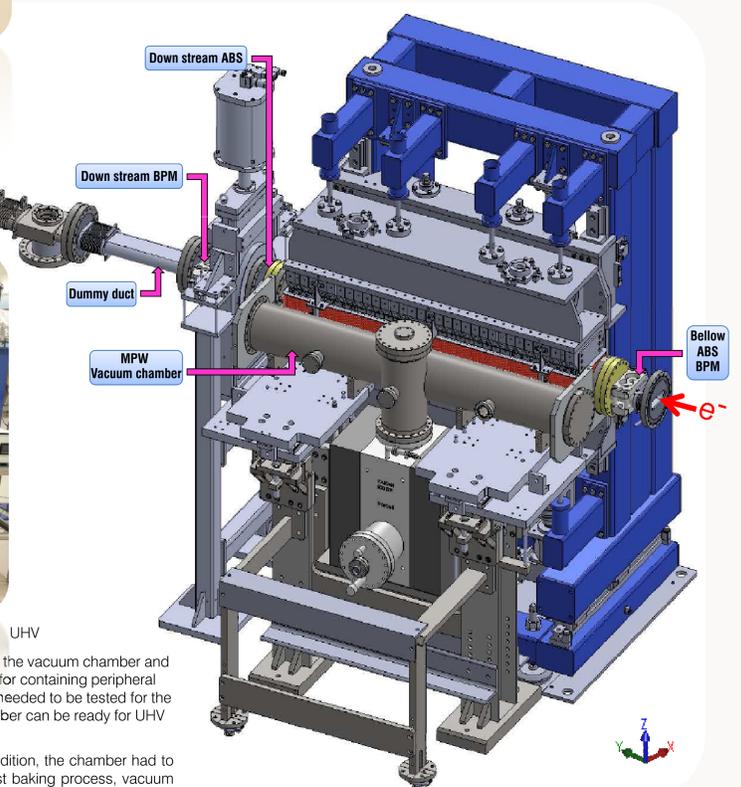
The detailed 3D CAD drawing of MPW vacuum chamber and peripheral components
